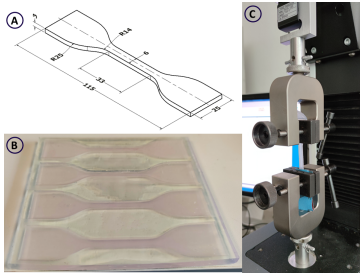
A) Specimen's dimensions based on the ASTM D412 protocols Die C. B) The mold and the molded specimens with Elite-Silicone mixture material. C) A specimen installed on the Instron low force electromechanical universal testing machine.
